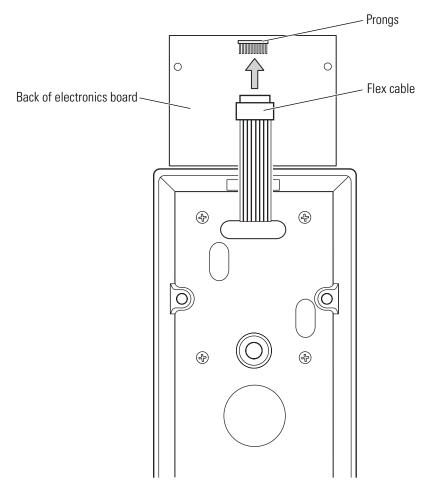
Disconnecting the flex cable from the Keypad EZ control electronics board
